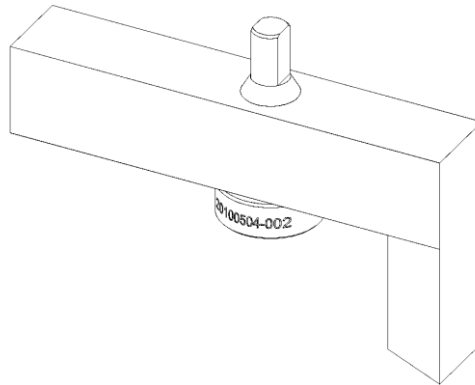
Weld Plate Gauge Tool Assembly
